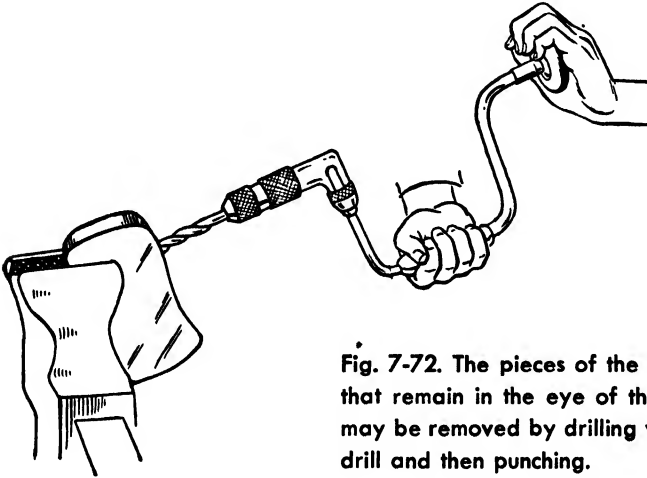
The pieces of the old handle that remain in the eye of the ax head may be removed by drilling with a twist drill and then punching.
